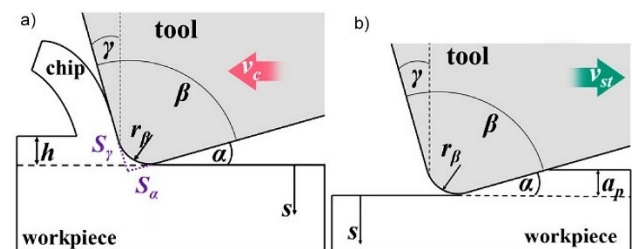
Complementary machining contact conditions include: a) machining and b) mechanical surface modification [60].
